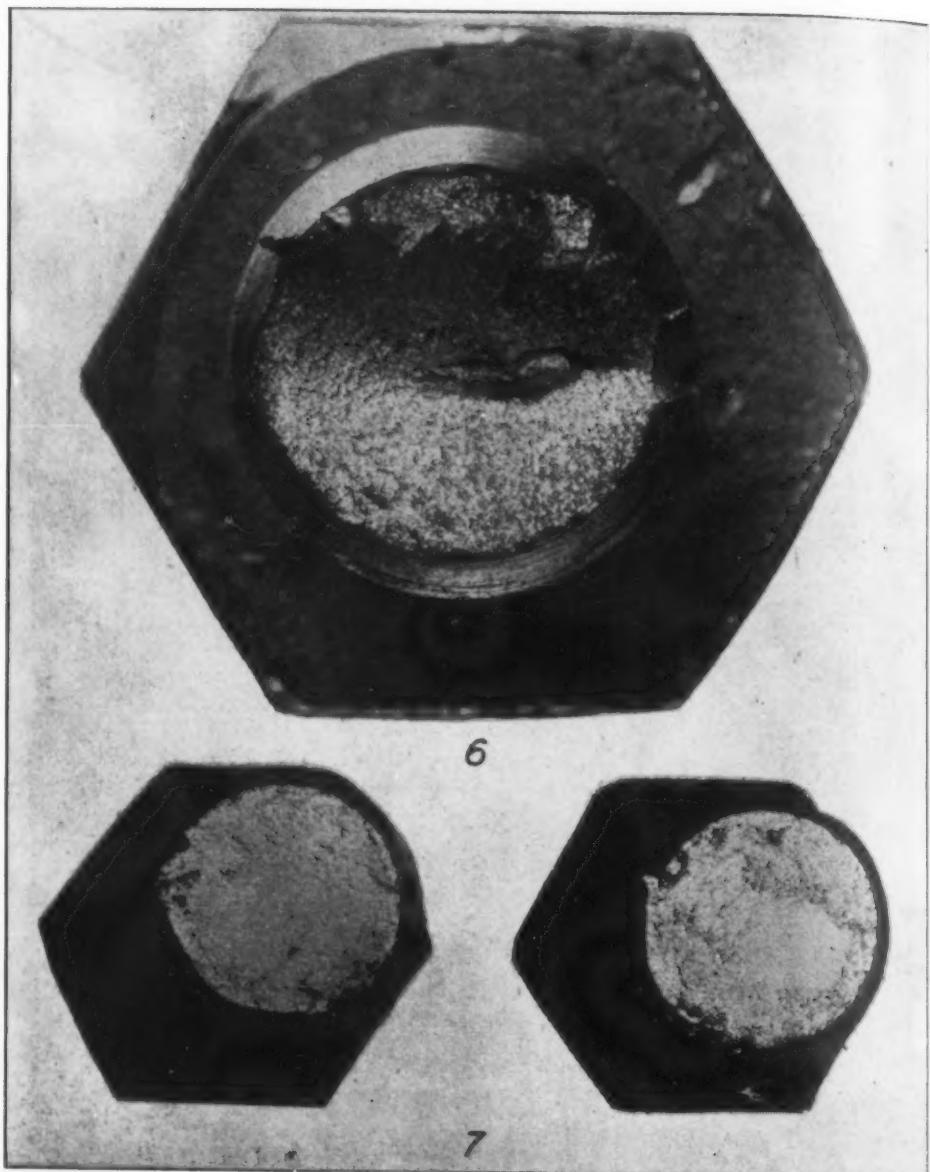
Photograph Showing Typical Fatigue Failure in a Bolt, and Shows how Fatigue Cracks Gradually Spread. The Light Colored Areas Show Where the Cross Section Finally Failed Statical. Fig. 7—Showing a Number of Bolts that Failed from Fatigue Caused by Expansion Stresses Due to Changes of Temperature.
